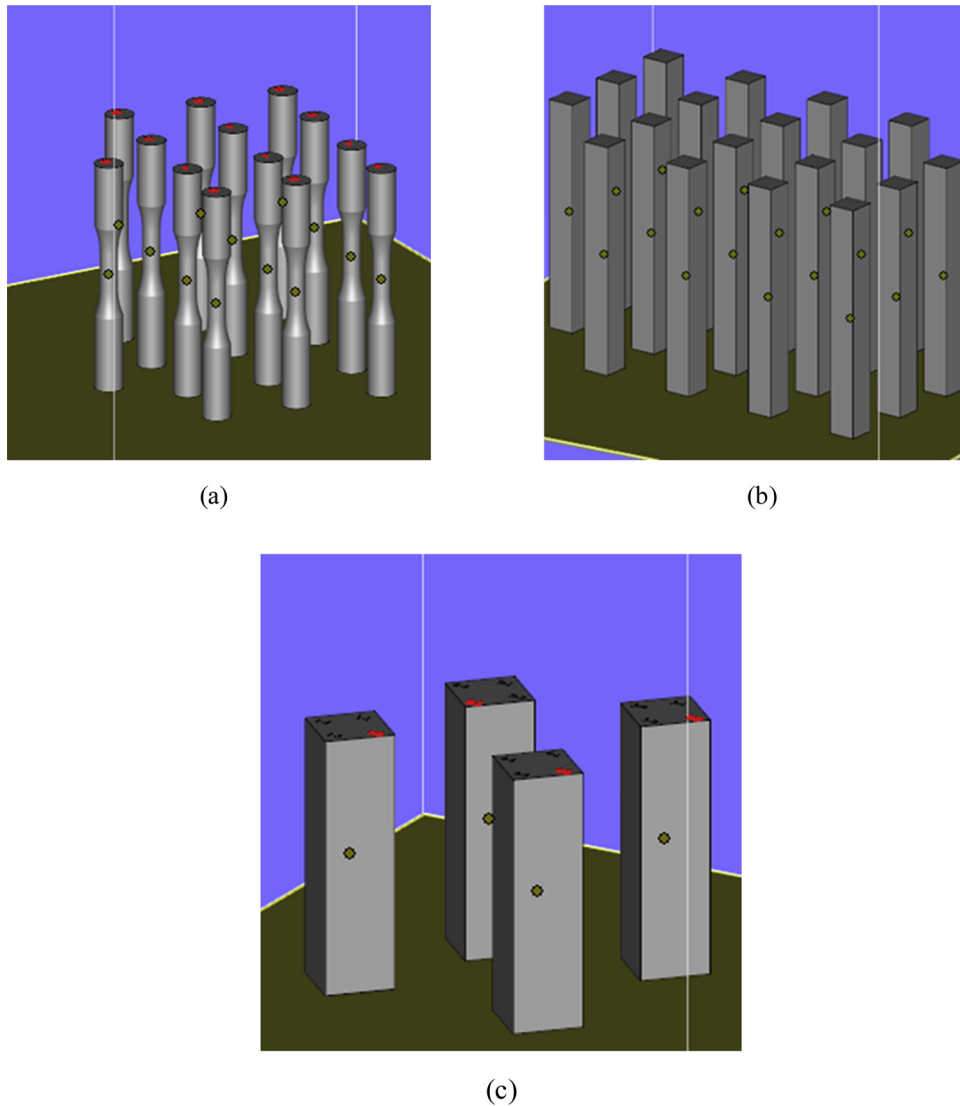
LB-PBF 17-4 PH SS parts fabricated in vertical direction with three different geometries: (a) cylindrical dog-bone parts with 7 mm gage diameter, 90 mm height and a time interval of ~ 59 s, (b) small blocks with dimensions of $12 \times 12 \times 90 \text{ mm}^3$ and a time interval of ~ 52 s [33], and (c) large blocks with dimensions of $25 \times 25 \times 90 \text{ mm}^3$ with a time interval of ~ 59 s.
